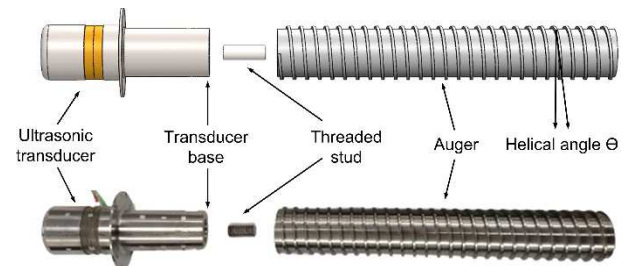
5° helical angle ultrasonic auger model and real device as manufactured
